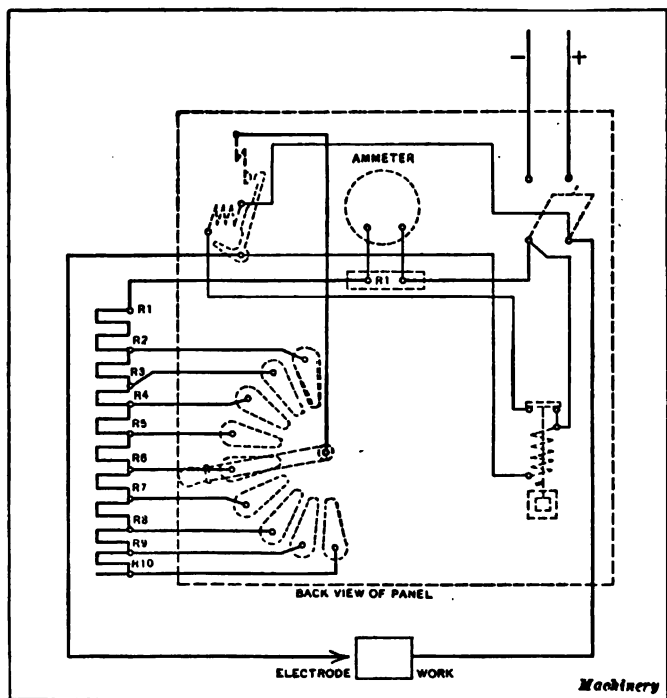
Connections for General Electric Co. Arc-welding Auxiliary Control Panel for One Welding Circuit
